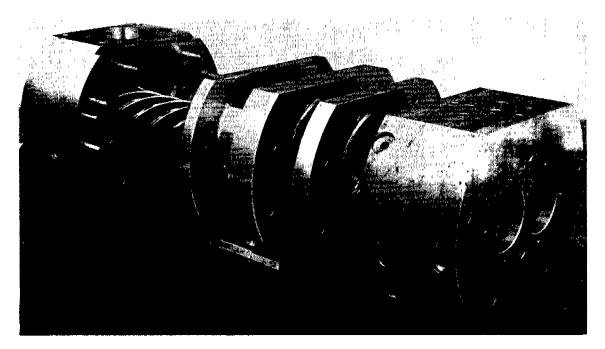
EXPLODED VIEW OF DEVELOPMENT COMPRESSOR
